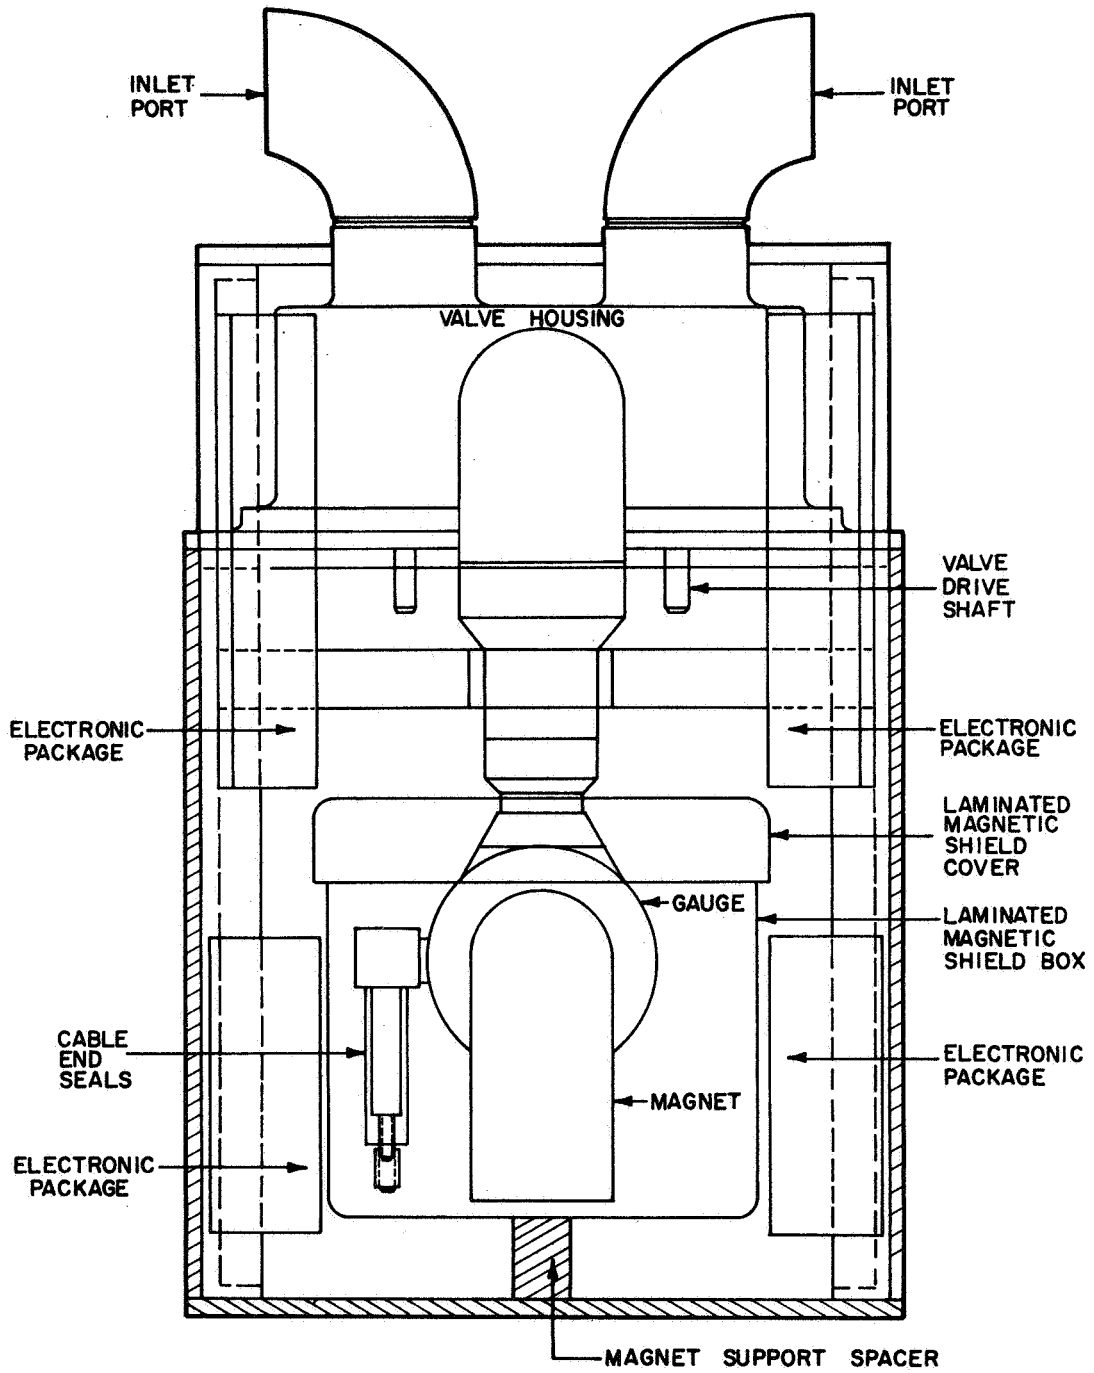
Front view of linear reciprocating valve version of yaw attitude sensor package.
